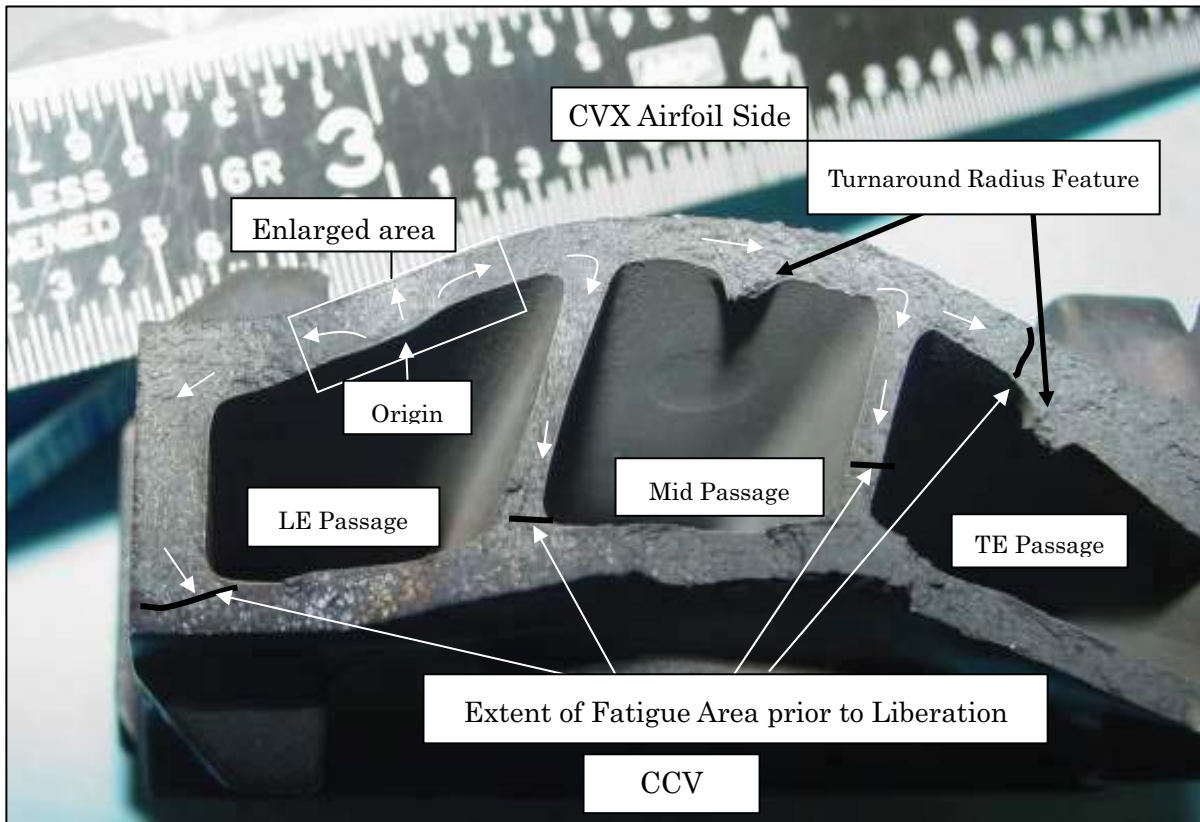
Fracture Origin of #58 Blade and Internal Cooling Air Passage
